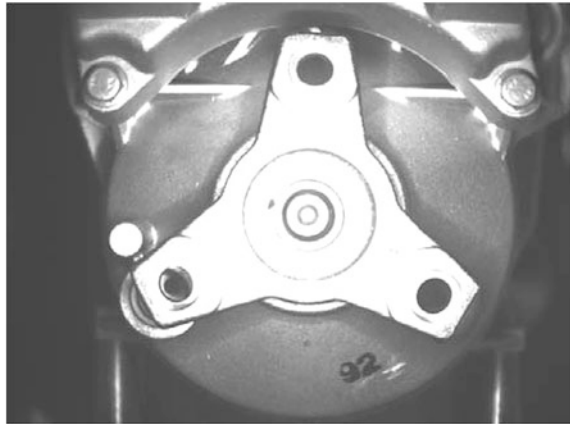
shows a complete three-armed flange. We can see a correctly crimped nut in the middle. It can be seen that the flange can be inspected using the same illumination as for the crimping. Only the camera has to be switched because a much larger field of view is required for this part of the inspection.
